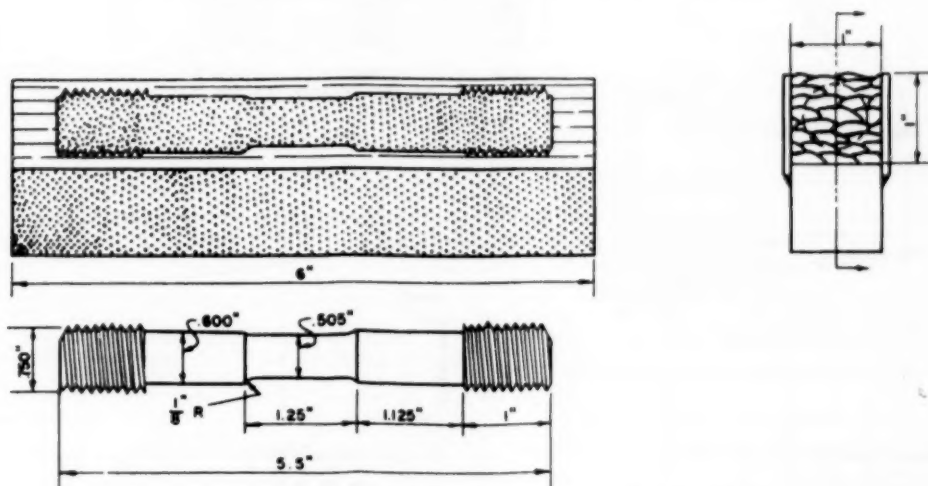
(b) SPECIMEN TAKEN PARALLEL TO DIRECTION OF WELD BEADS
